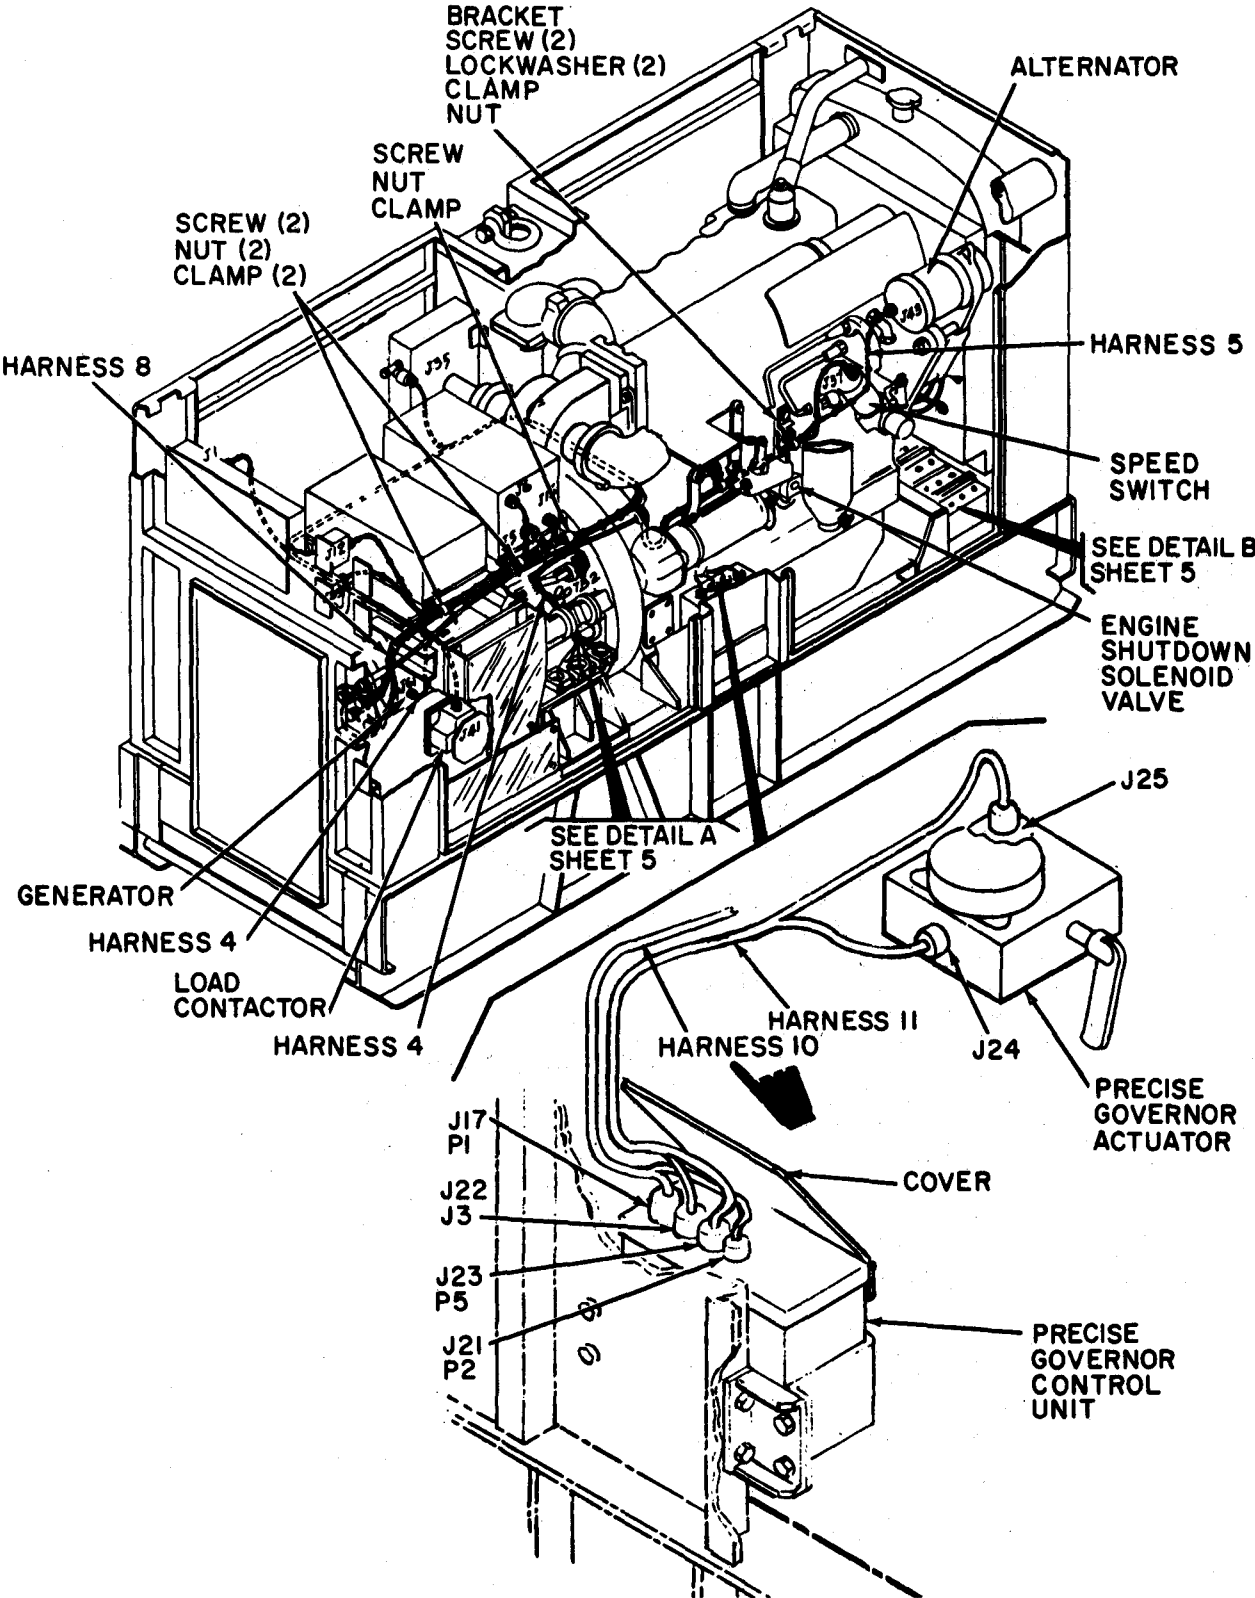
Wiring harnesses 50/60 hertz generator sets, removal and installation (sheet 4 of 5)
